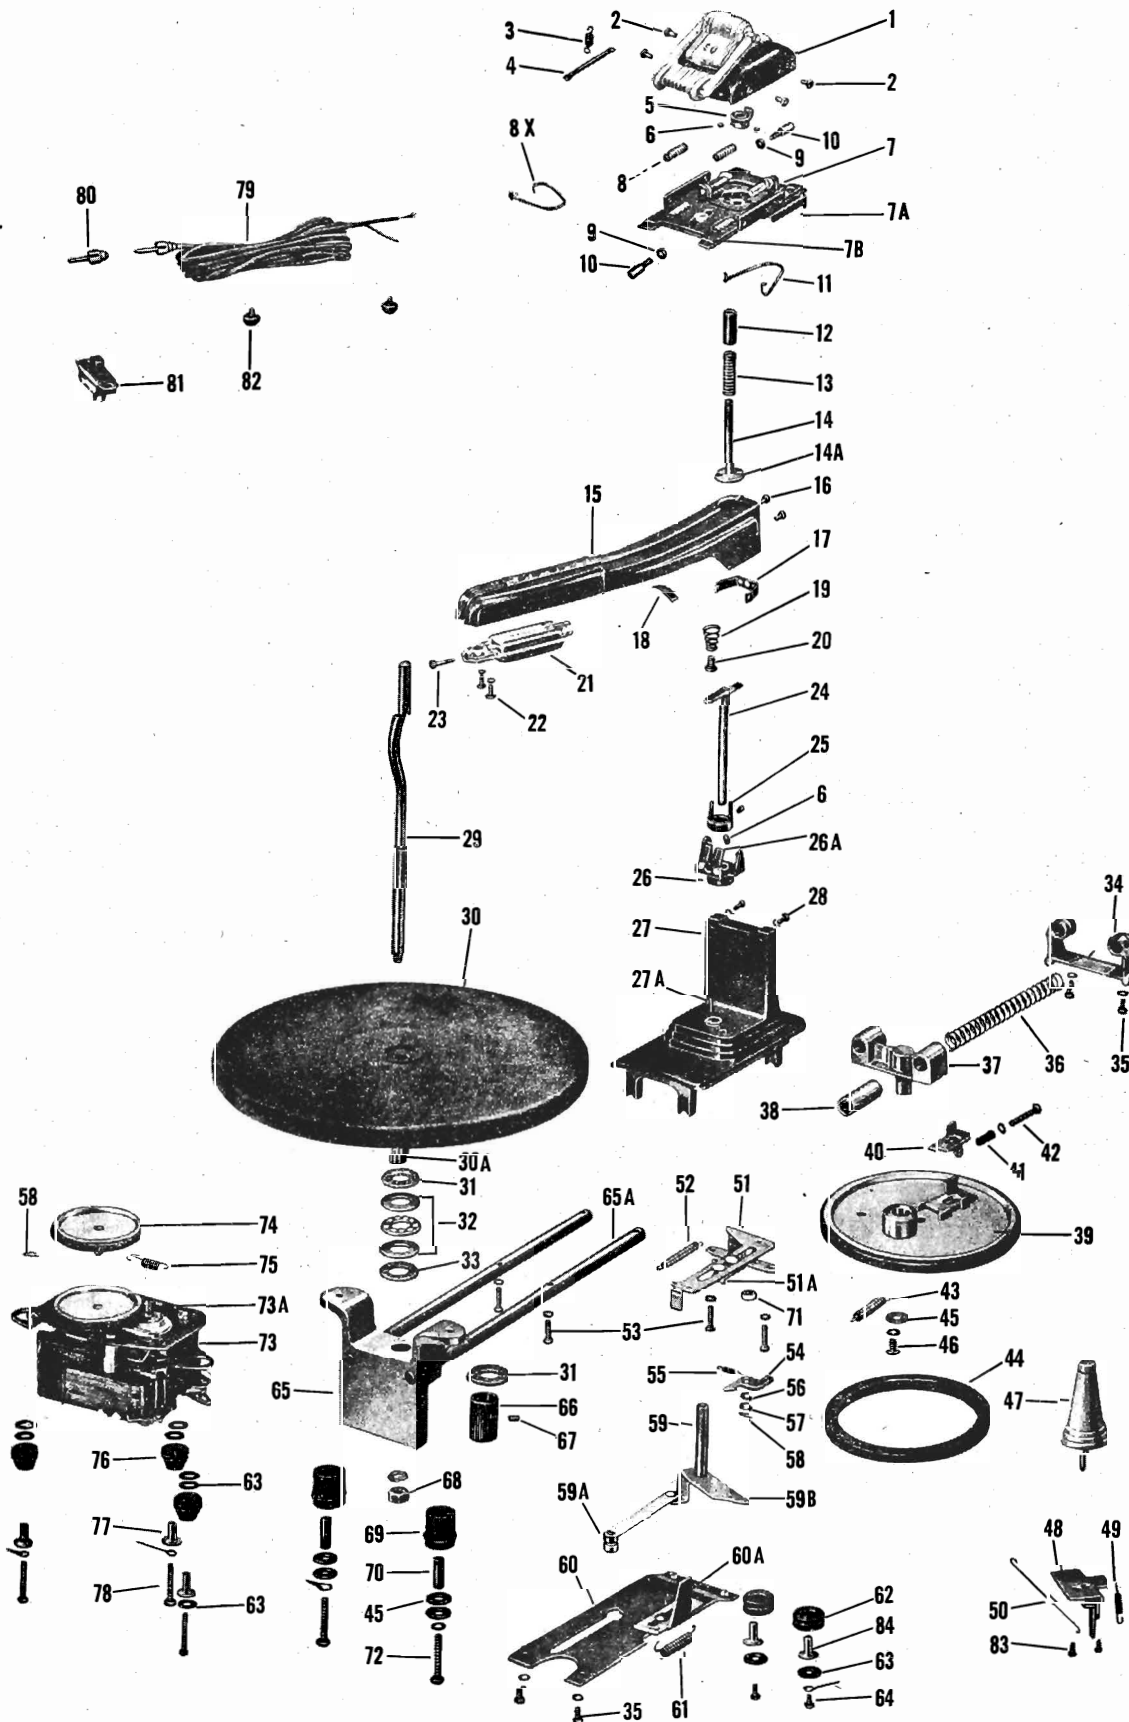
RECORD CHANGER, EXPLODED VIEW
